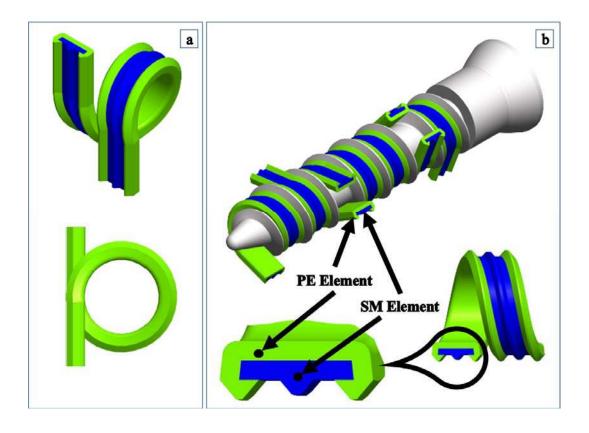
Schematic of screw-nitinol insert system inside the body (T_{vivo}) (a) Schematic view of expanded/original form of nitinol insert (b) Screw-nitinol insert assembly after placement inside the hip during THR and enlarged view of nitinol elements which is pseudoelastic (PE) and shape memory (SM) respectively.
